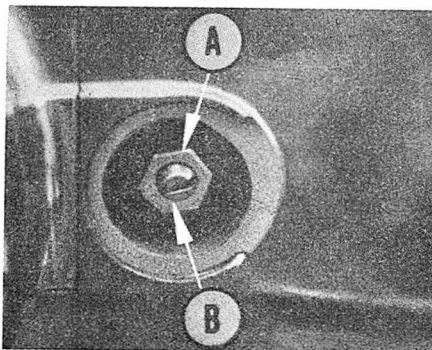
After removing rubber plug on left engine cover, loosen lock nut (A) and turn screw (B) to adjust clutch.
